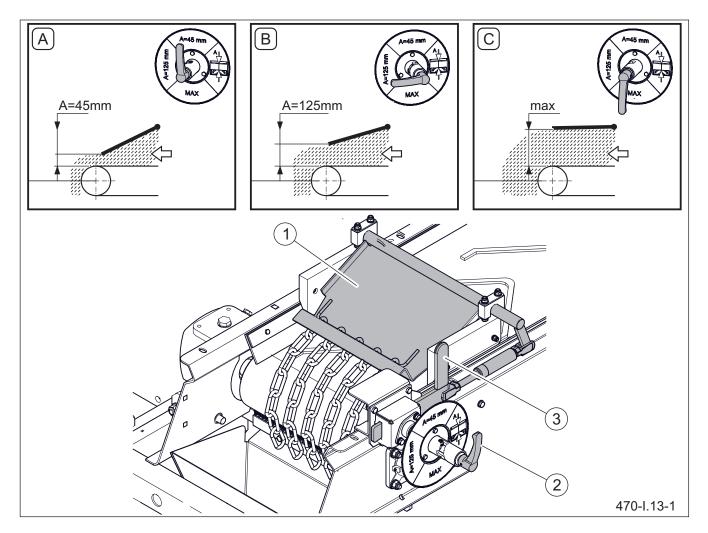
Setting the belt conveyor barrier (A) salt spreading (B) sand spreadir
